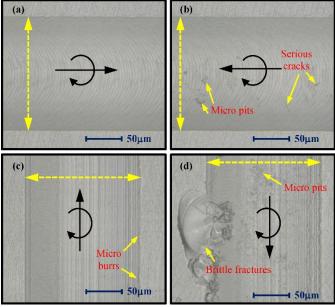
Morphologies of micro groove surface for different milling modes: (a) pull-milling; (b) push-milling; (c) up-milling; (d) down-milling
